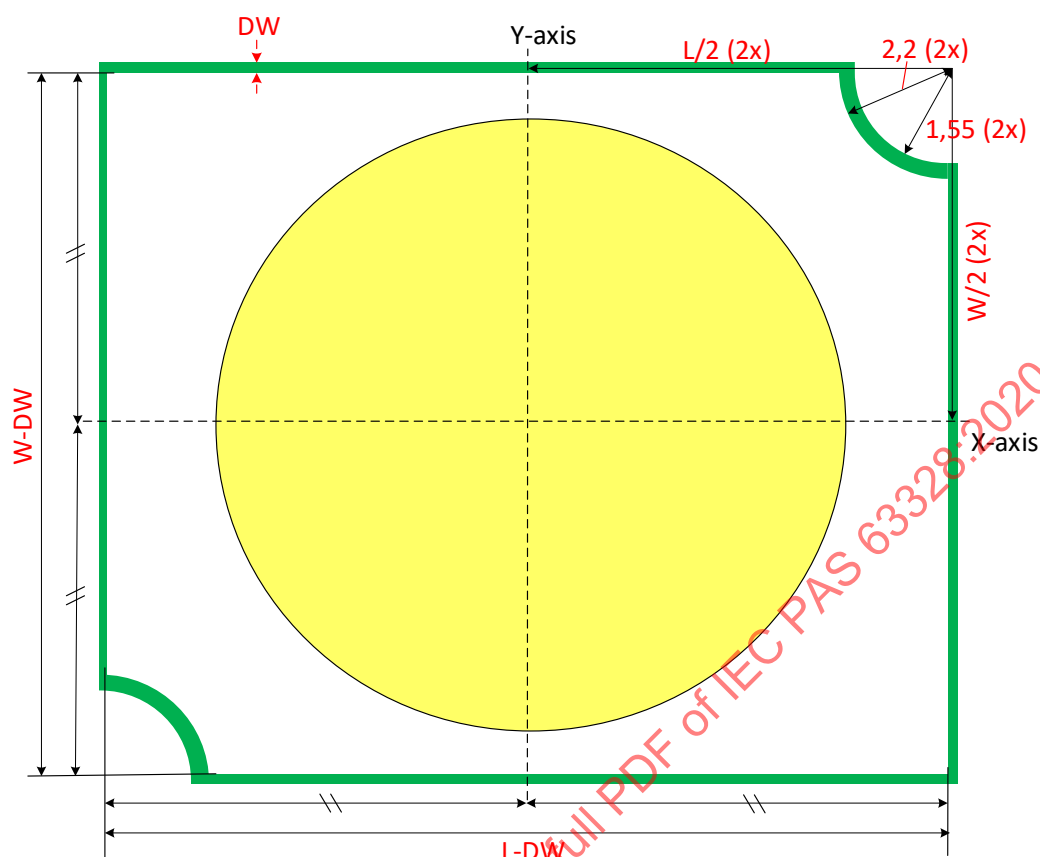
Demarcation model – top view for the outline and mounting holes of the LED Array in one of the categories C28x28 or C24x24
